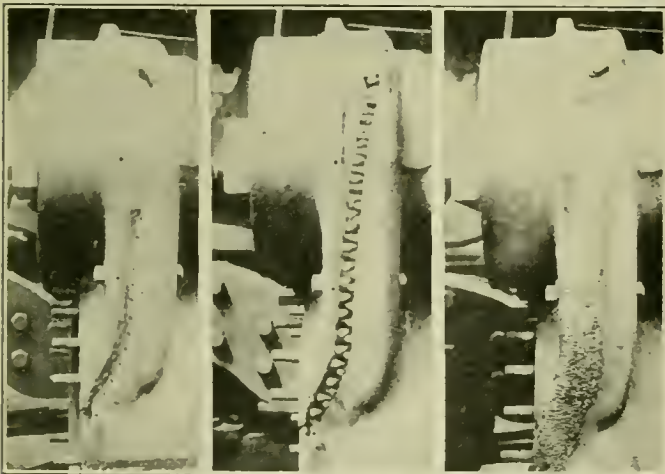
Locomotive Cylinder Wall Beveled, Studded and Welded
